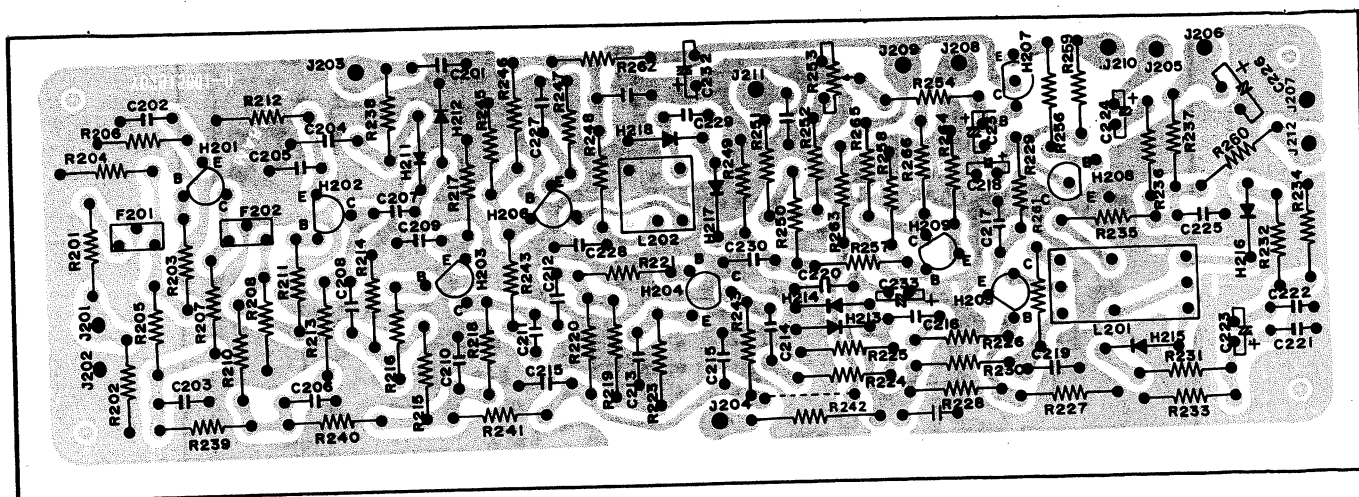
FM Front End and AM Tuner Assembly P100 Component Locations
